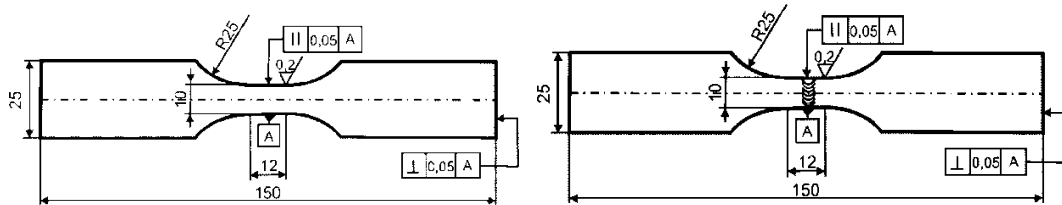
left: Fatigue specimen for the basic material; right: Butt joint fatigue specimen.
